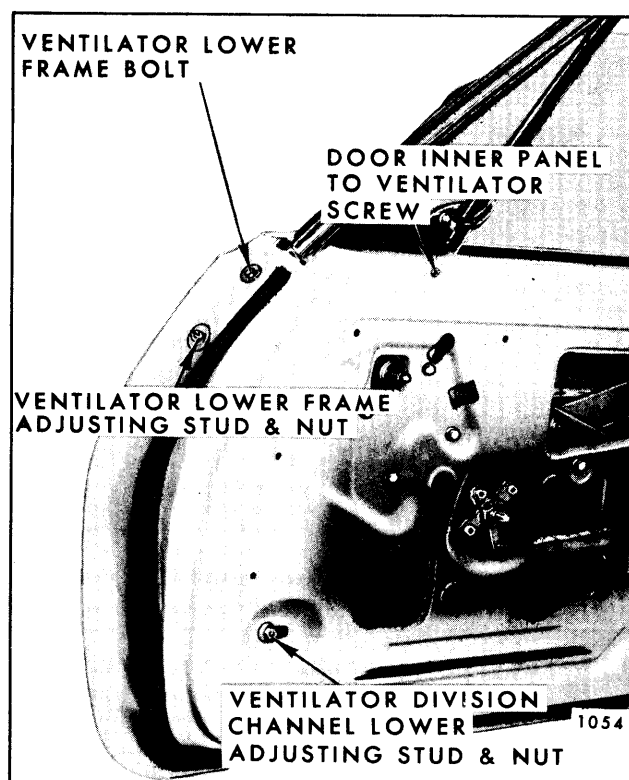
Front Door Ventilator Attachments - “Z” Styles
